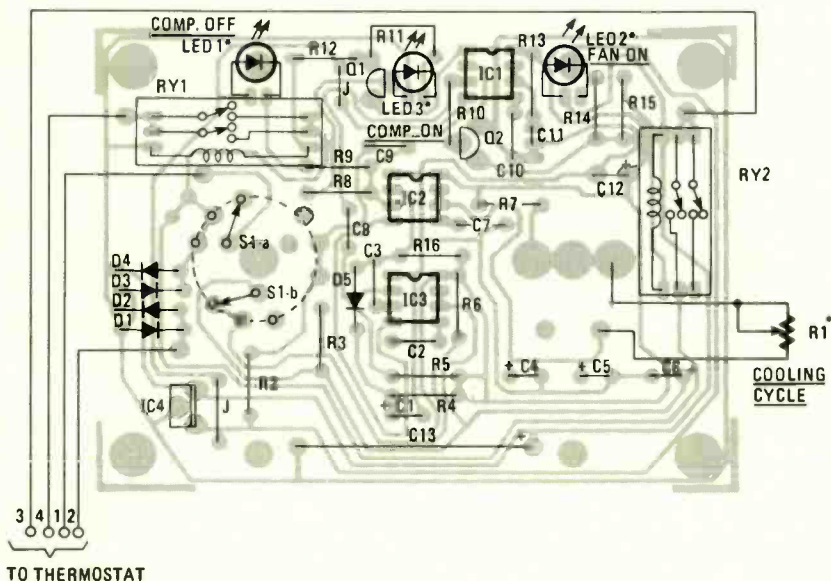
PARTS-PLACEMENT diagram. The three LED's (marked by *) are mounted on the foil side of the board, as is R1, the COOLING-CYCLE control.
